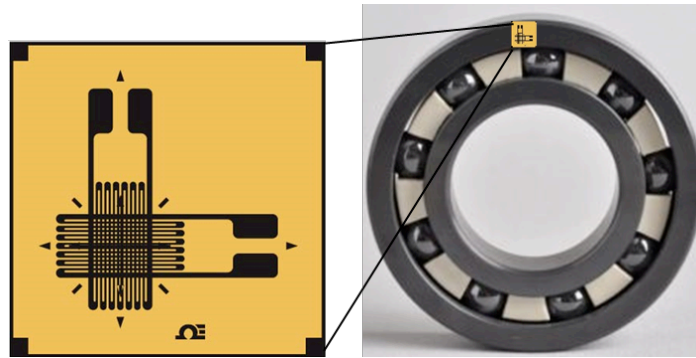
Strain gauge mounting to measure strain on the outer race of the bearing.
